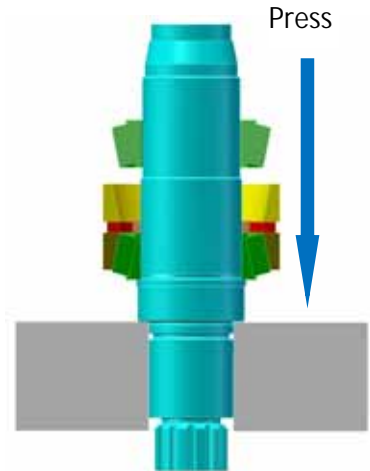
Pressing Lower Bearing Assembly onto Shaft
